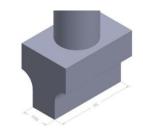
Shape of the ultrasonic welding horn used
